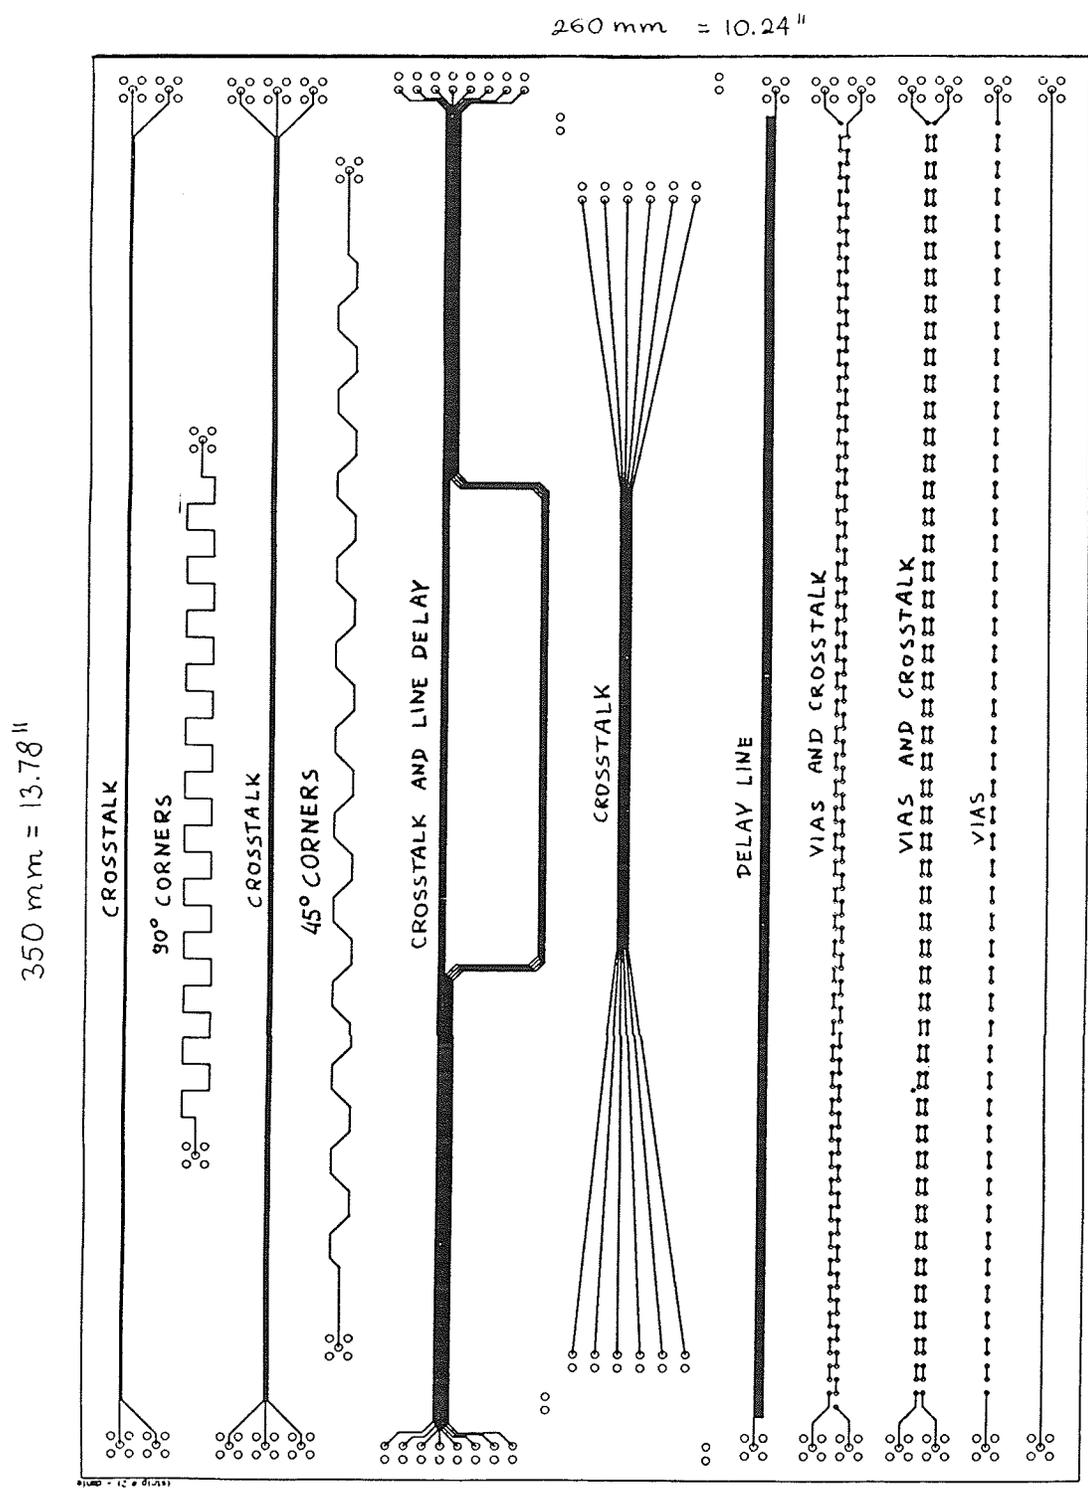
Top view of the designed PCB. The solder side of the board for measurements of vias and corners.
